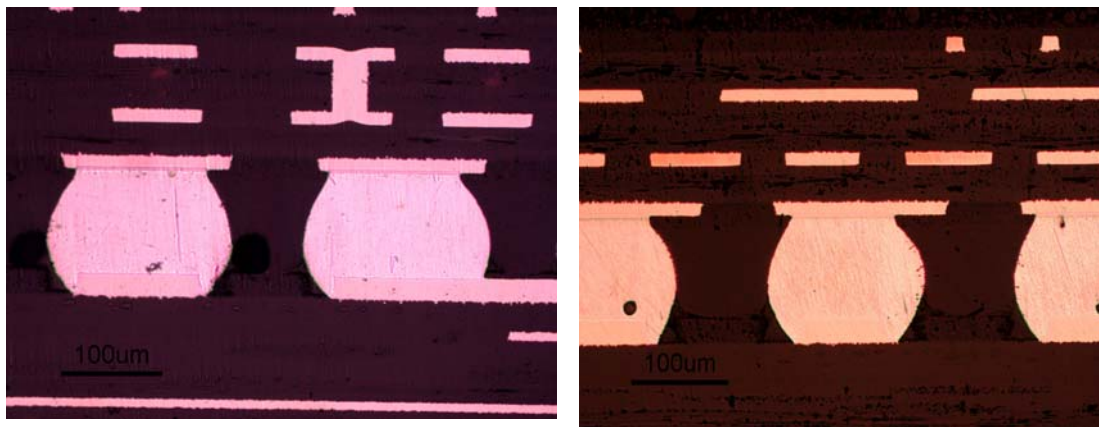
Examples of solder joints for Ag and OSP packages (no ball failures were observed on any of the joints for these two types)
